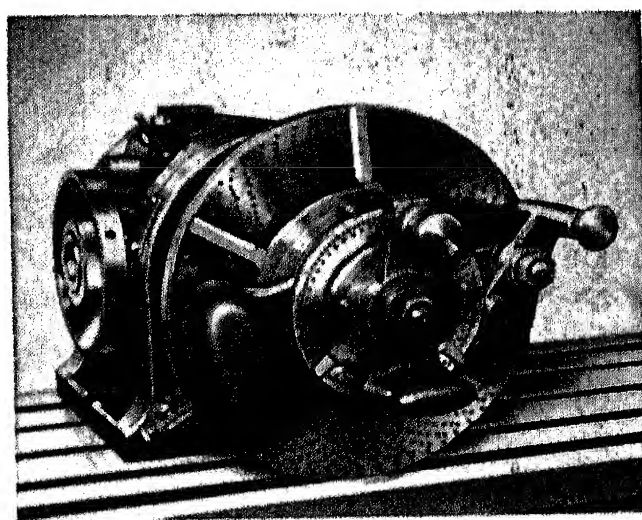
A dividing head with a wide range divider. (Courtesy The Cincinnati Milling Machine Co.)
